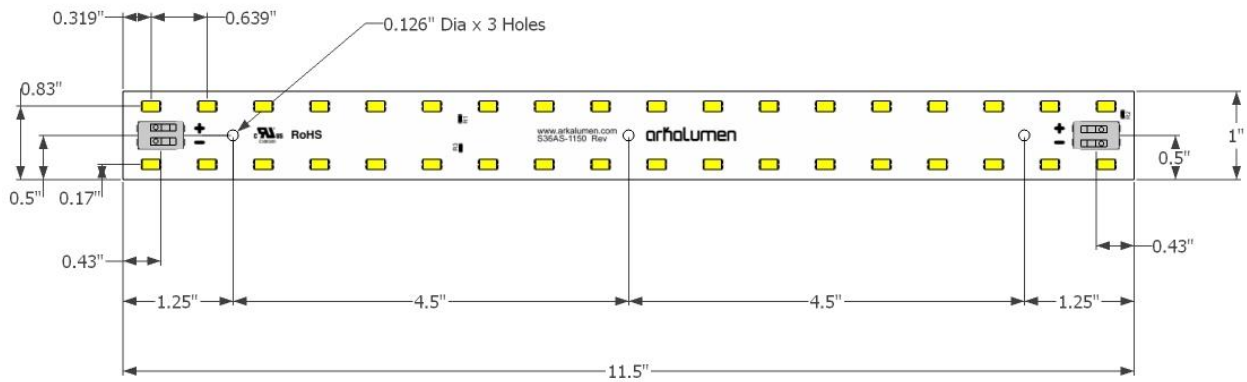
S36SA-36V-1152 Mechanical Drawing
